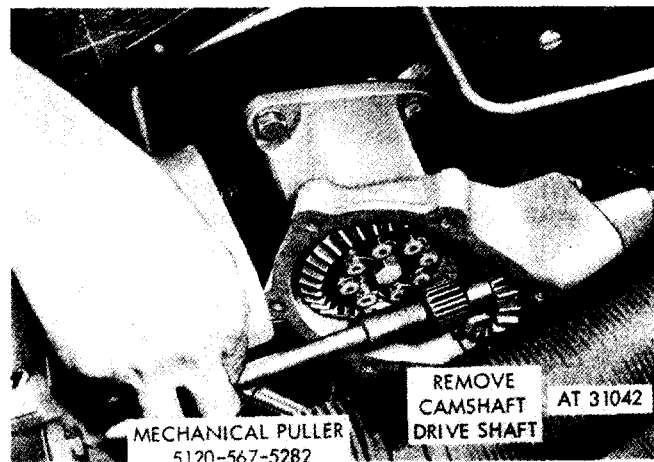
Removing or installing camshaft drive shaft using mechanical puller-5120-678-5282.
